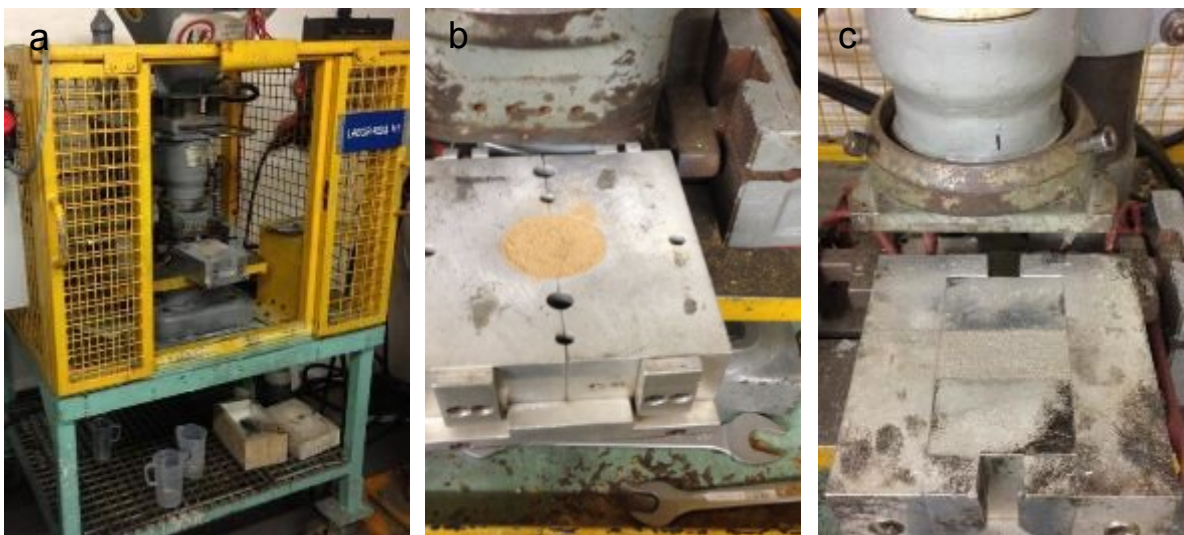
(a) Core shooting machine with the preheated mould (b). Installed cylindrical shape mould (c) Installed trapezoidal shape mould.
